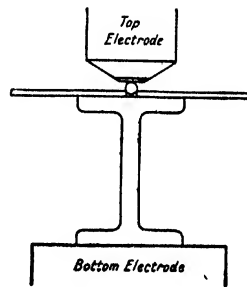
WELDING TWO SHEETS TO ANGLE OR TABLE
